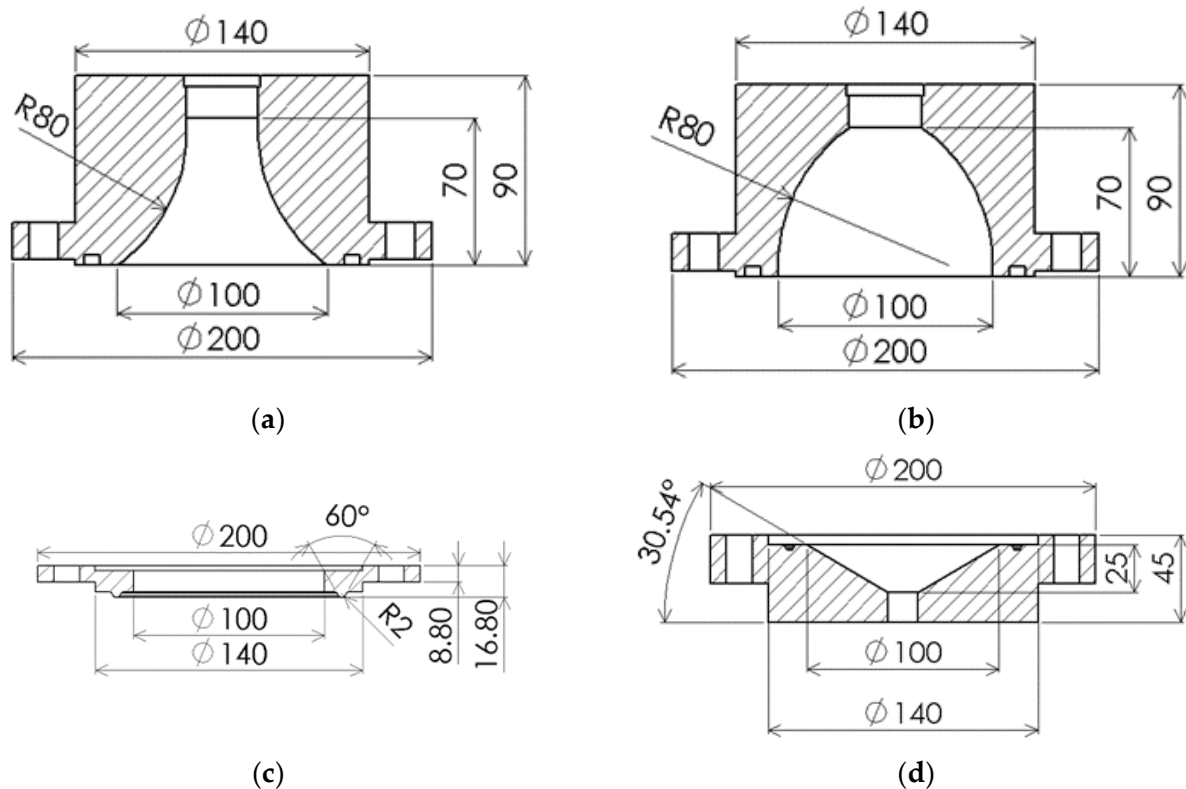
Cross-sectional view of the forming equipment. (a) Hyperbolic pressure vessel. (b) Parabolic pressure vessel. (c) Plate holder. (d) Die.
